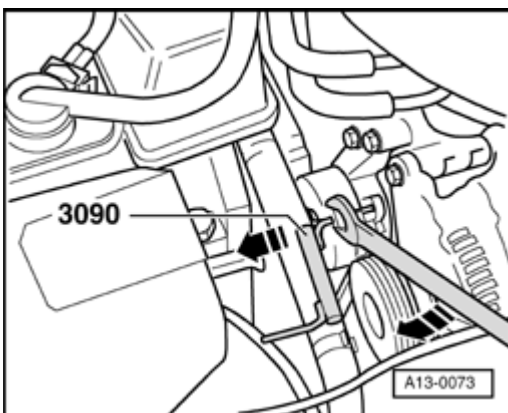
Pulling Out Punch Or Connecting Rod Support 3090
